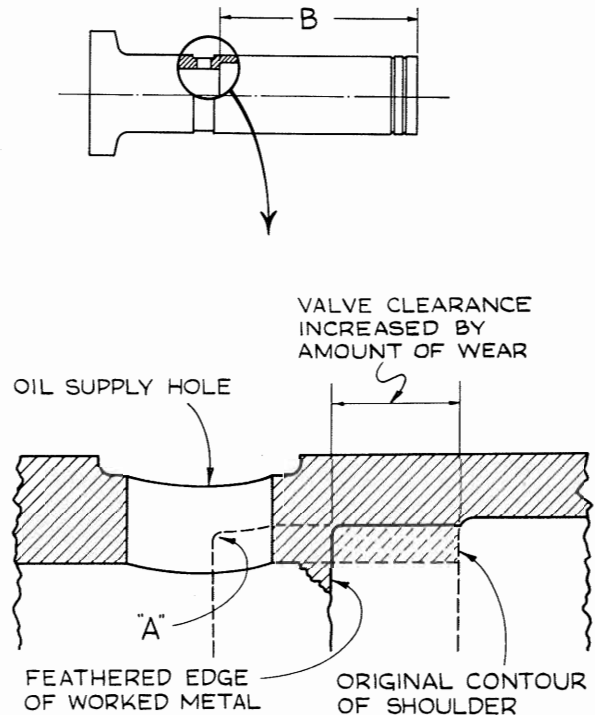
Sectional View at Location of Oil Hole In Tappet Body
